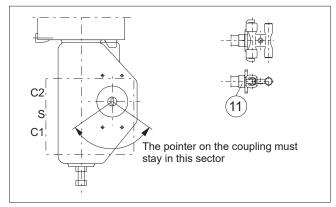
Mounting on Neles actuator with VDI/VDE mounting face
